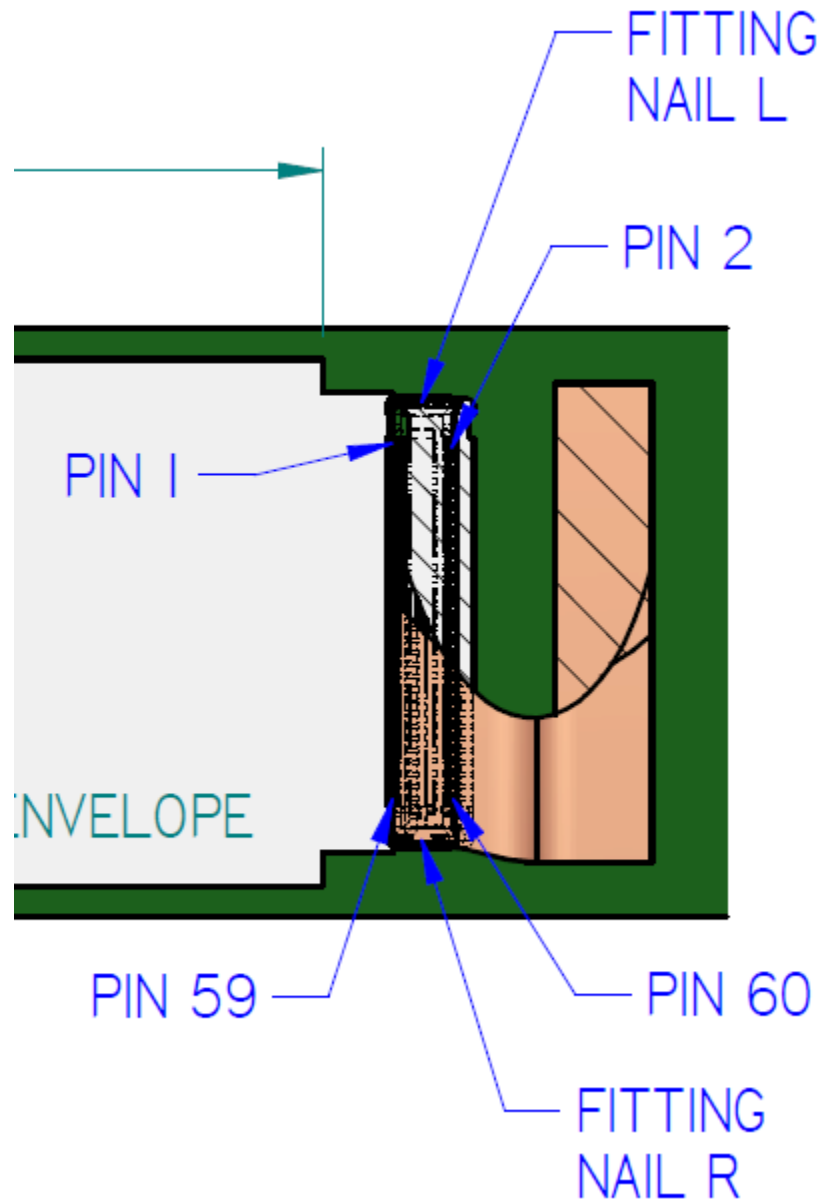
Type-2 Low Speed Host Connector Pin Designations (Top View of Package)
